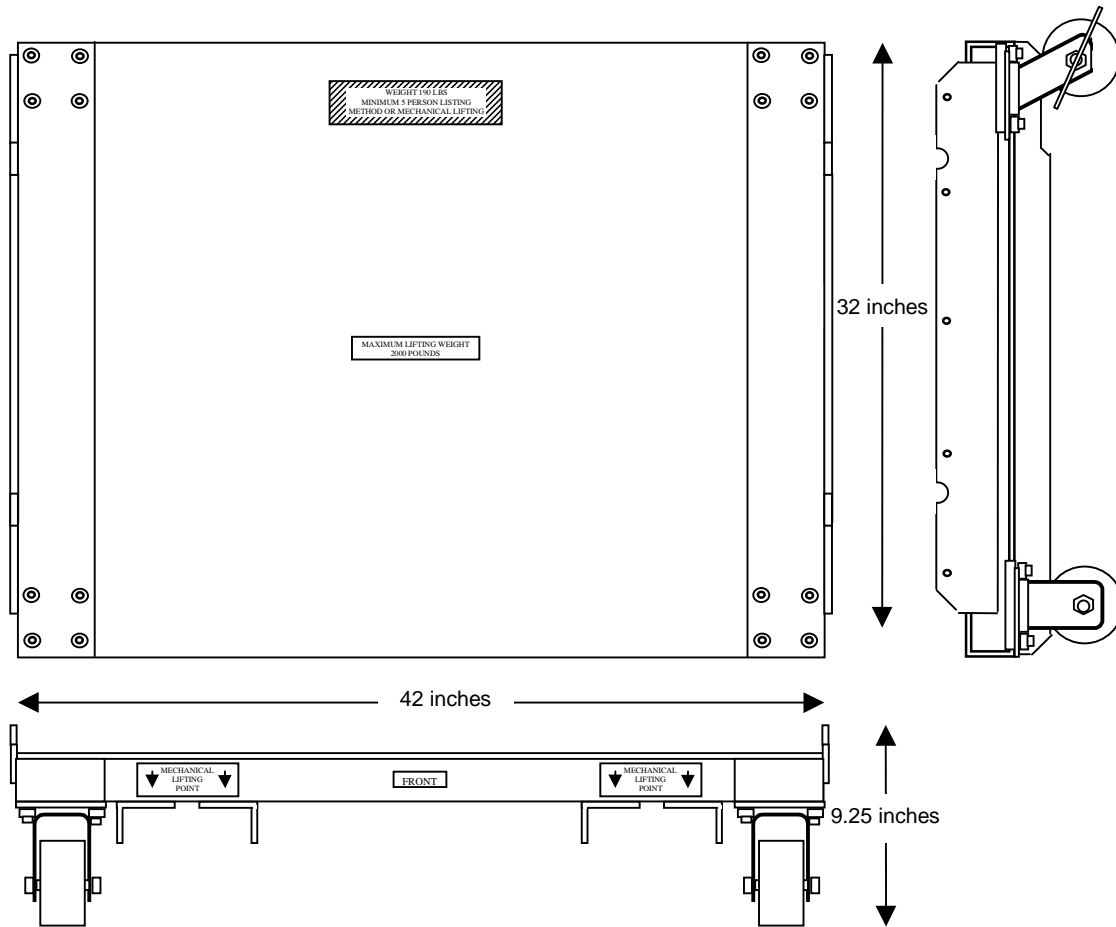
SSTF ISPR Castered Pallet
